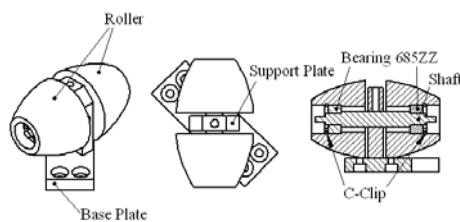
The sectional view of redesigned *Mecanum* wheel's roller.
